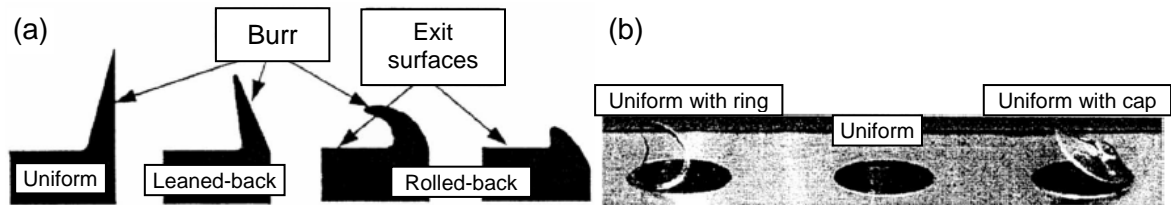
Burr types formed in: (a) dry cutting and (b) wet cutting [144]
